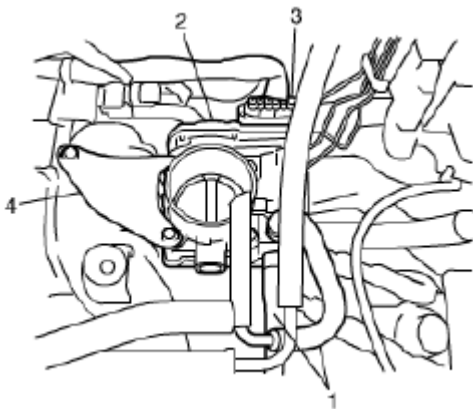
Identifying Electric Throttle Body Assembly With Stiffener & Engine Coolant Hoses
